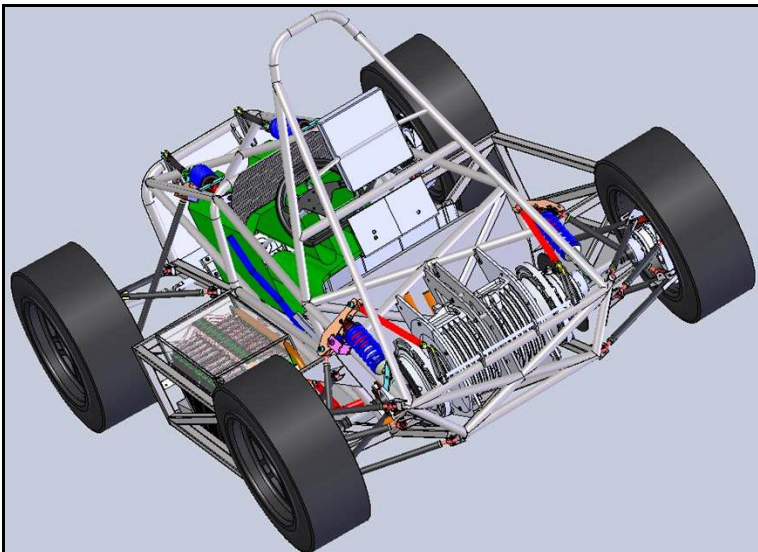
RMIT R10E showing twin rear drive motors (the heavily finned items between the mounting plates), outboard of which are the planetary gearboxes.
